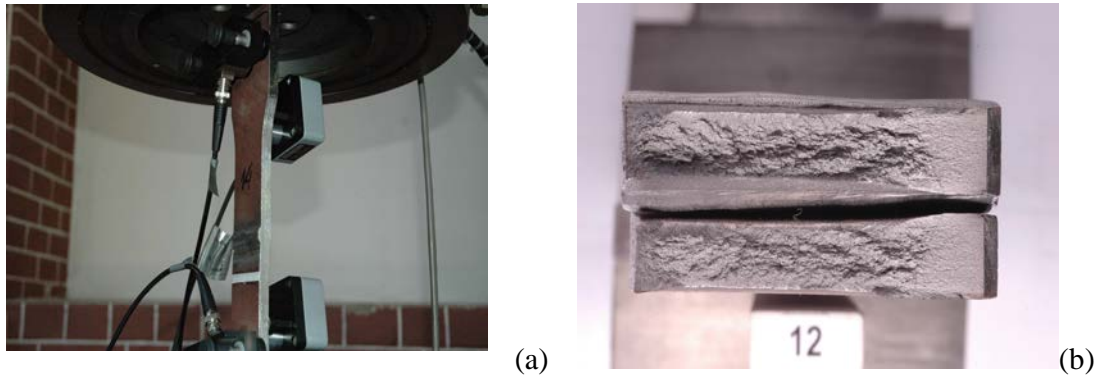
(a) Butt welded sample in testing machine; (b) Fractography of the fracture after breakthrough.
